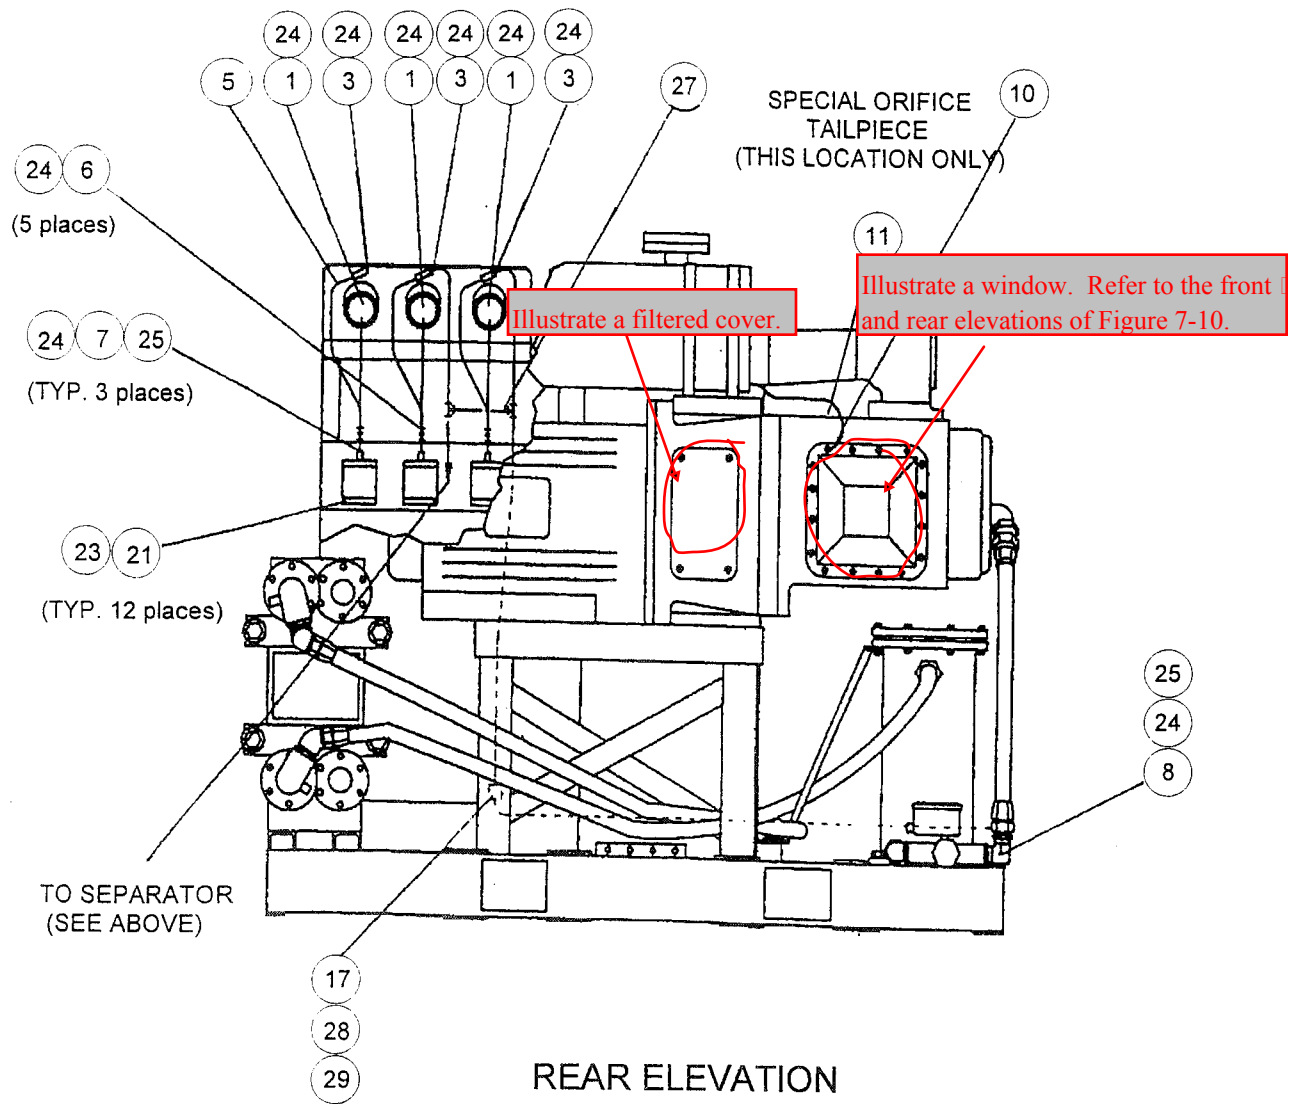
Instrumentation Arrangement (sheet 1 of 3)
